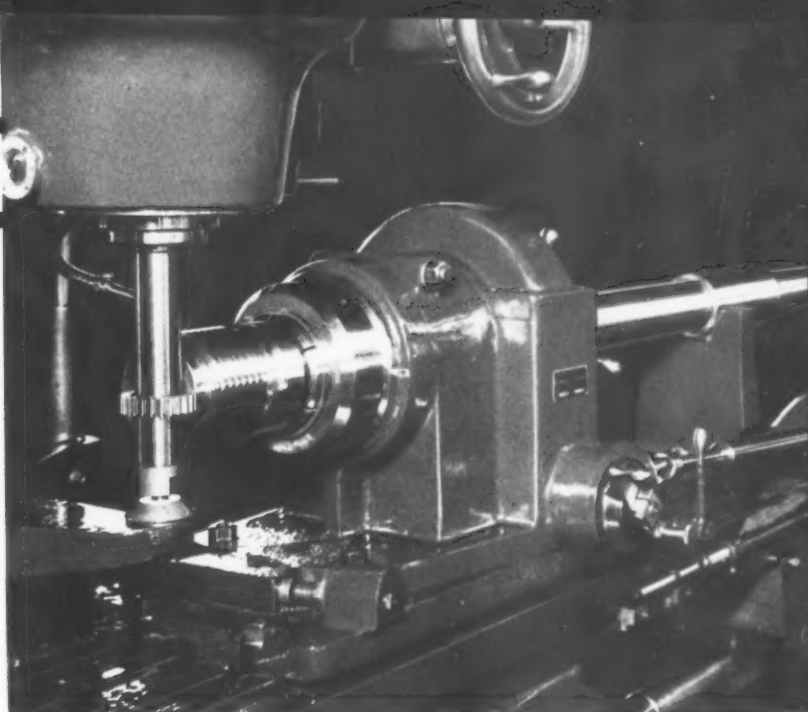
Machining Operations within Close Tolerances are Performed on the Breech End of the Gun by Means of the Vertical-spindle Milwaukee Milling Machine Here Shown
